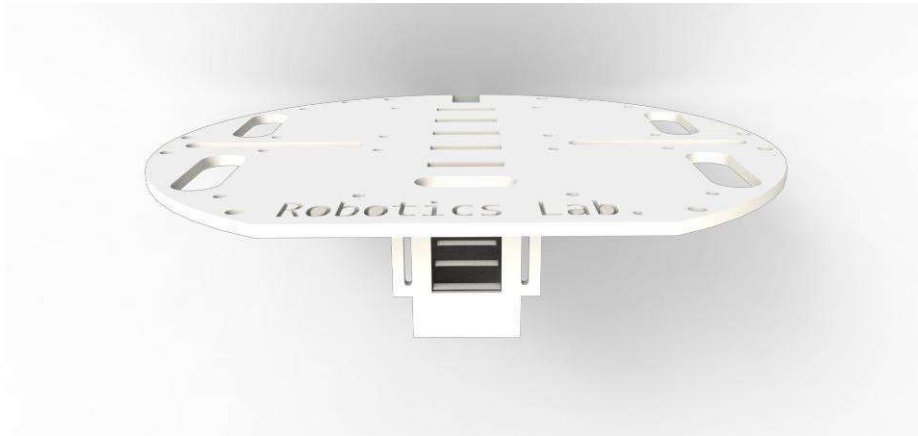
3D Printed Electronic Board and Battery Holder
